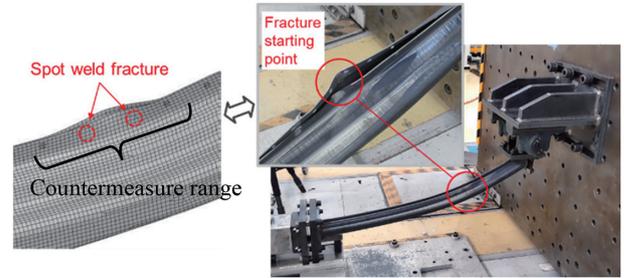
Result of crush test and spot weld fracture prediction in standard assembly condition
